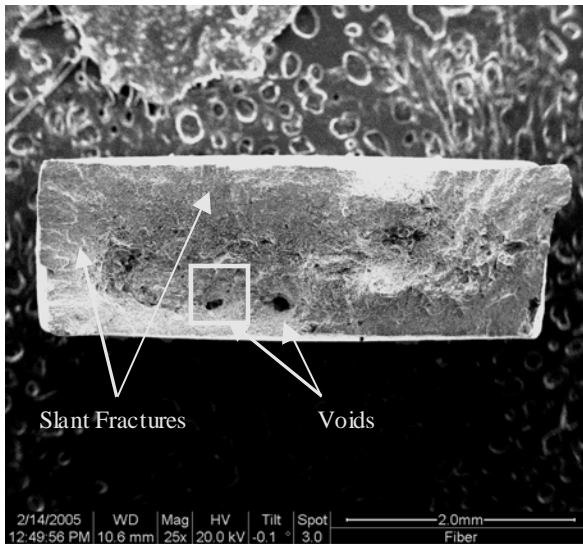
Specimen Ti-001, fracture surface from tensile test
